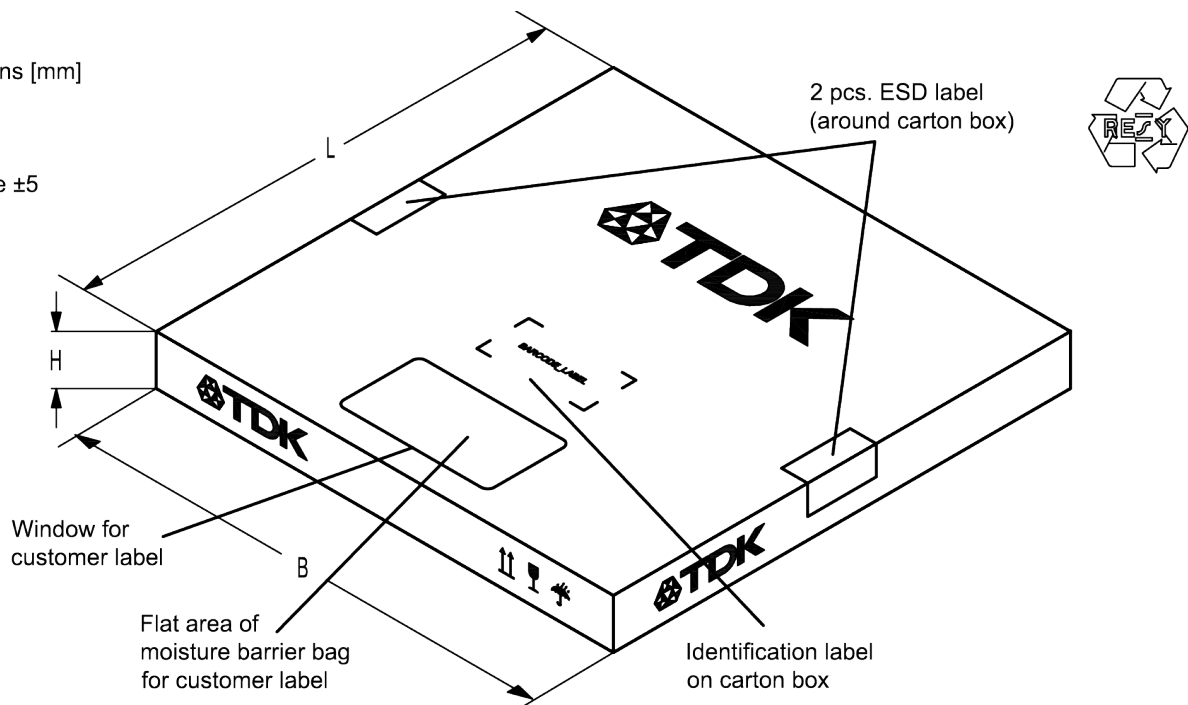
Drawing of folding box for reel with diameter of 180 mm.
